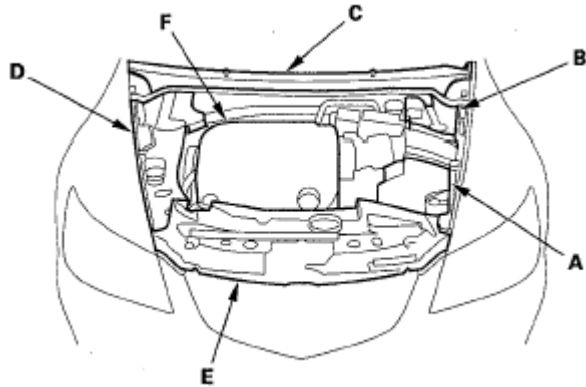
Identifying Battery Trim, Cowl Cover Upper Trim, Upper Grille Cover And Intake Manifold Cover
